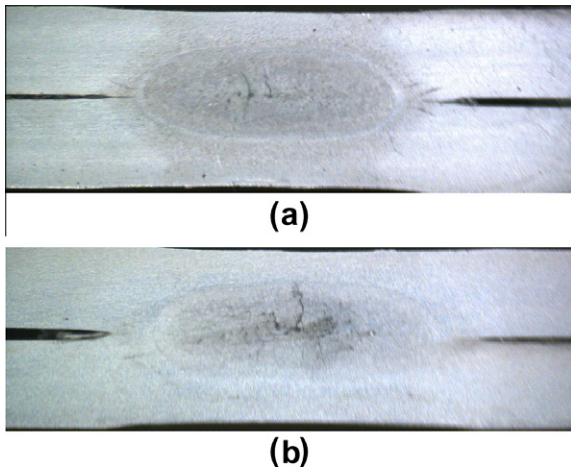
Nugget formation of (a) Weld A and (b) Weld B in RSW on aluminum alloy.
